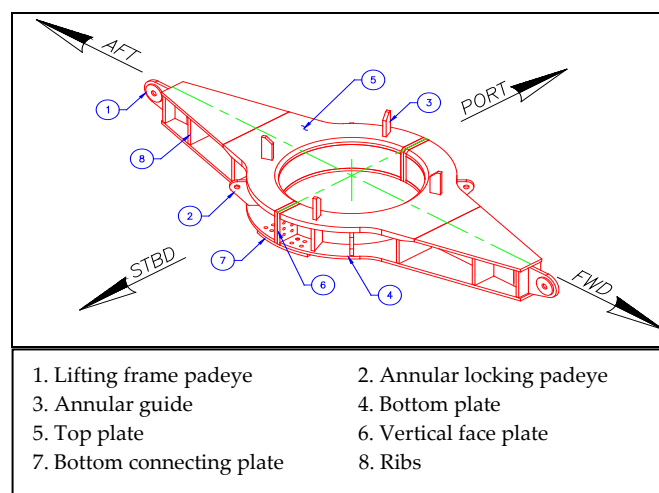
MAIN PARTS OF THE BOP LIFTING FRAME
